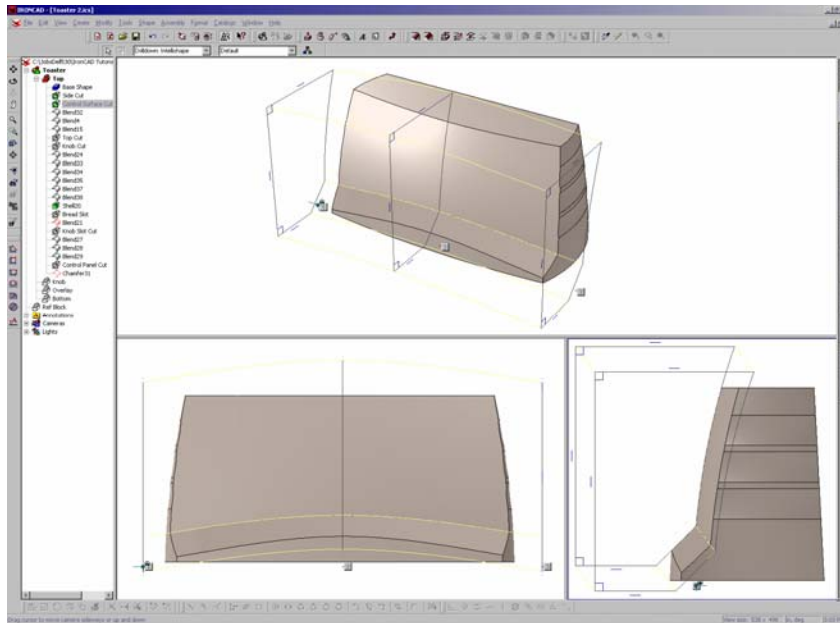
Front and Control Overlay Surfaces shown with Loft Cut in Perspective, Front, and Side Views
